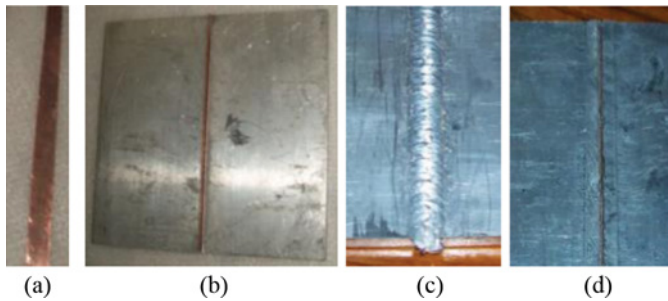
(a) Copper strip. (b) Aluminum plates and copper strip in assembly. (c) Top side. (d) Root side of weldment (color figure available online).
